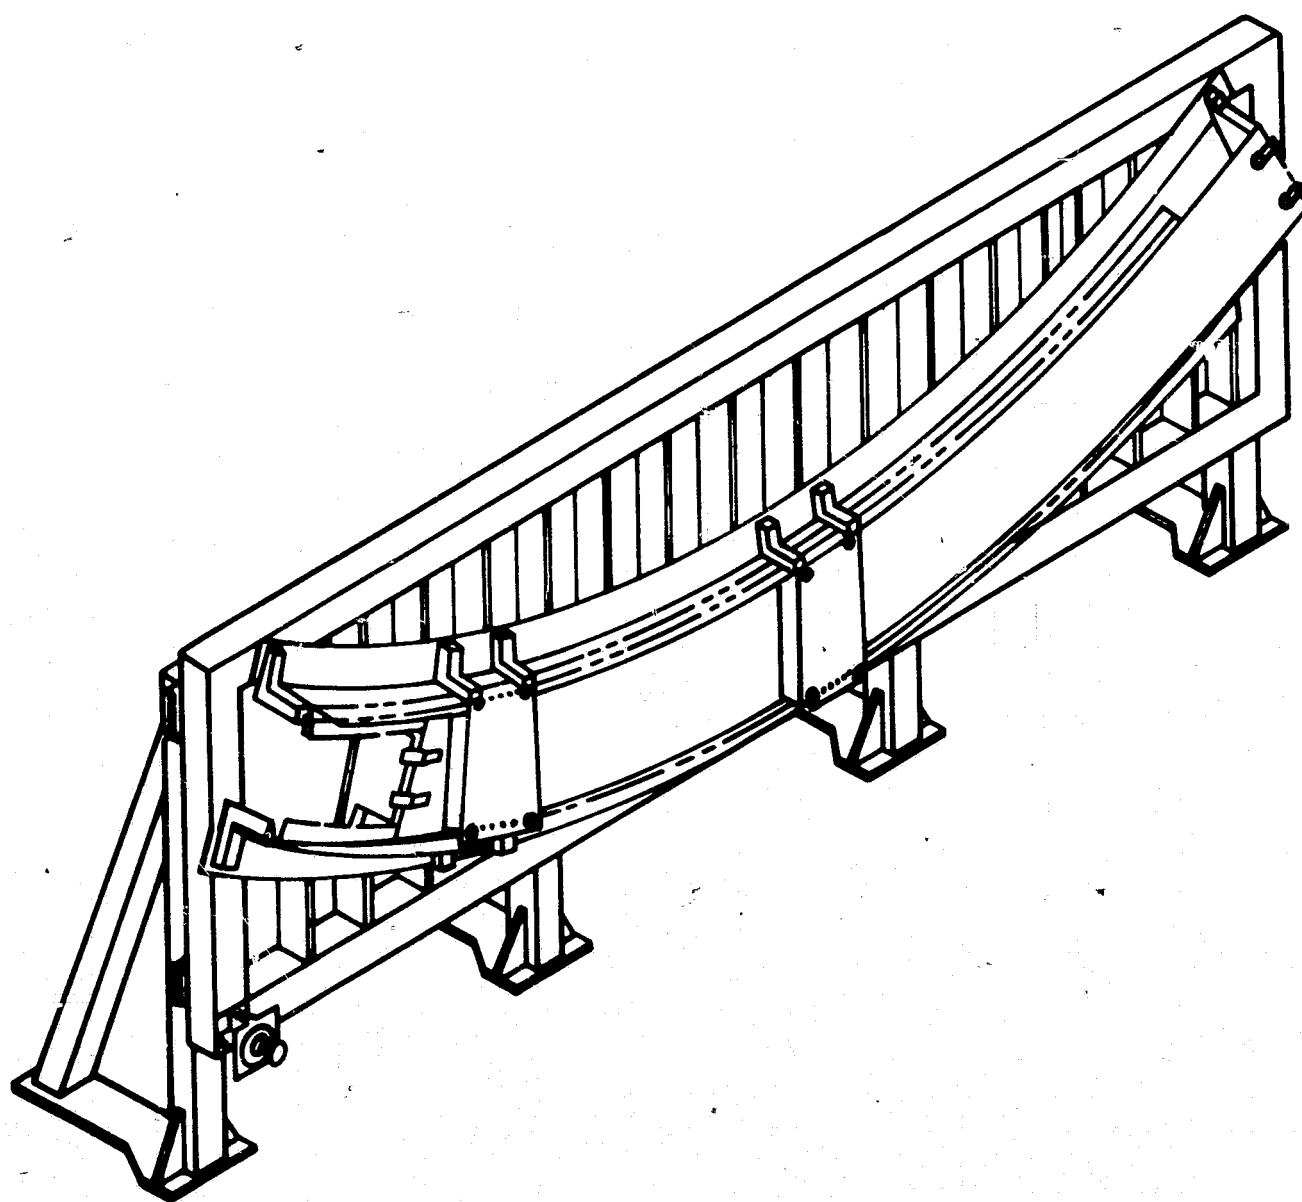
LOWER AND INTERMEDIATE RING ASSEMBLY FIXTURE
